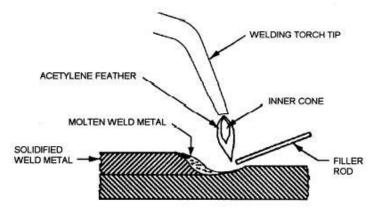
Oxyfuel gas welding (Kalpakjian, 2010)
